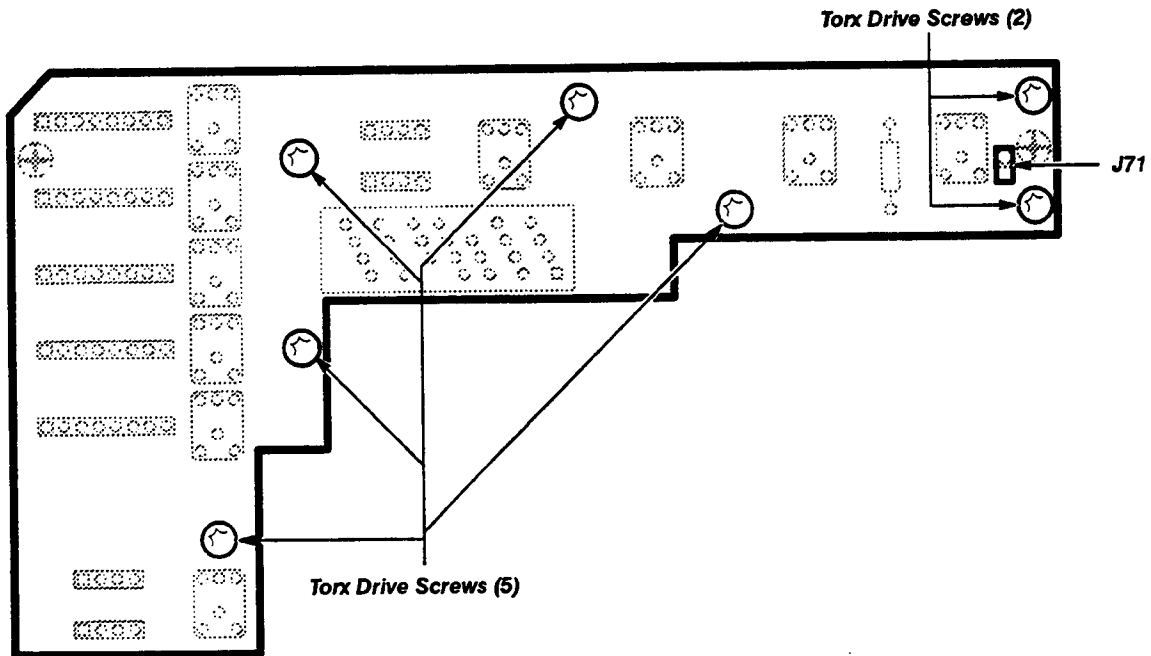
Removing/Replacing the A11 Front Panel Button Board
